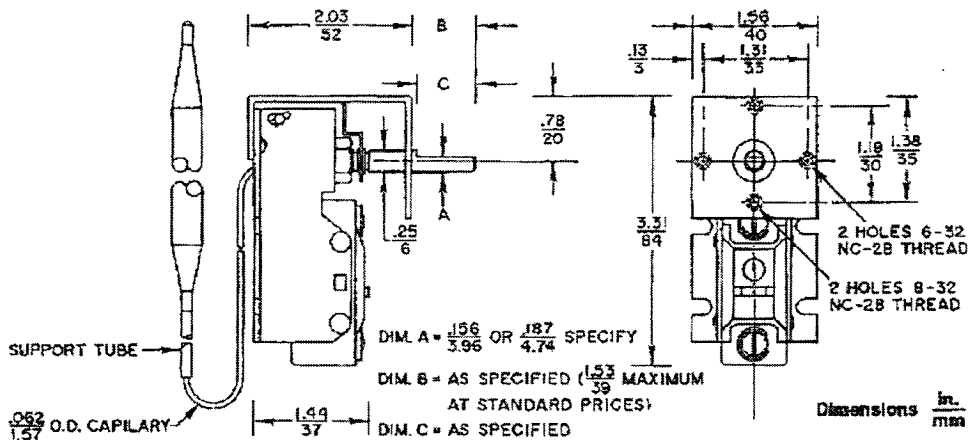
Center support, front mounting bracket, optional at extra cost.
